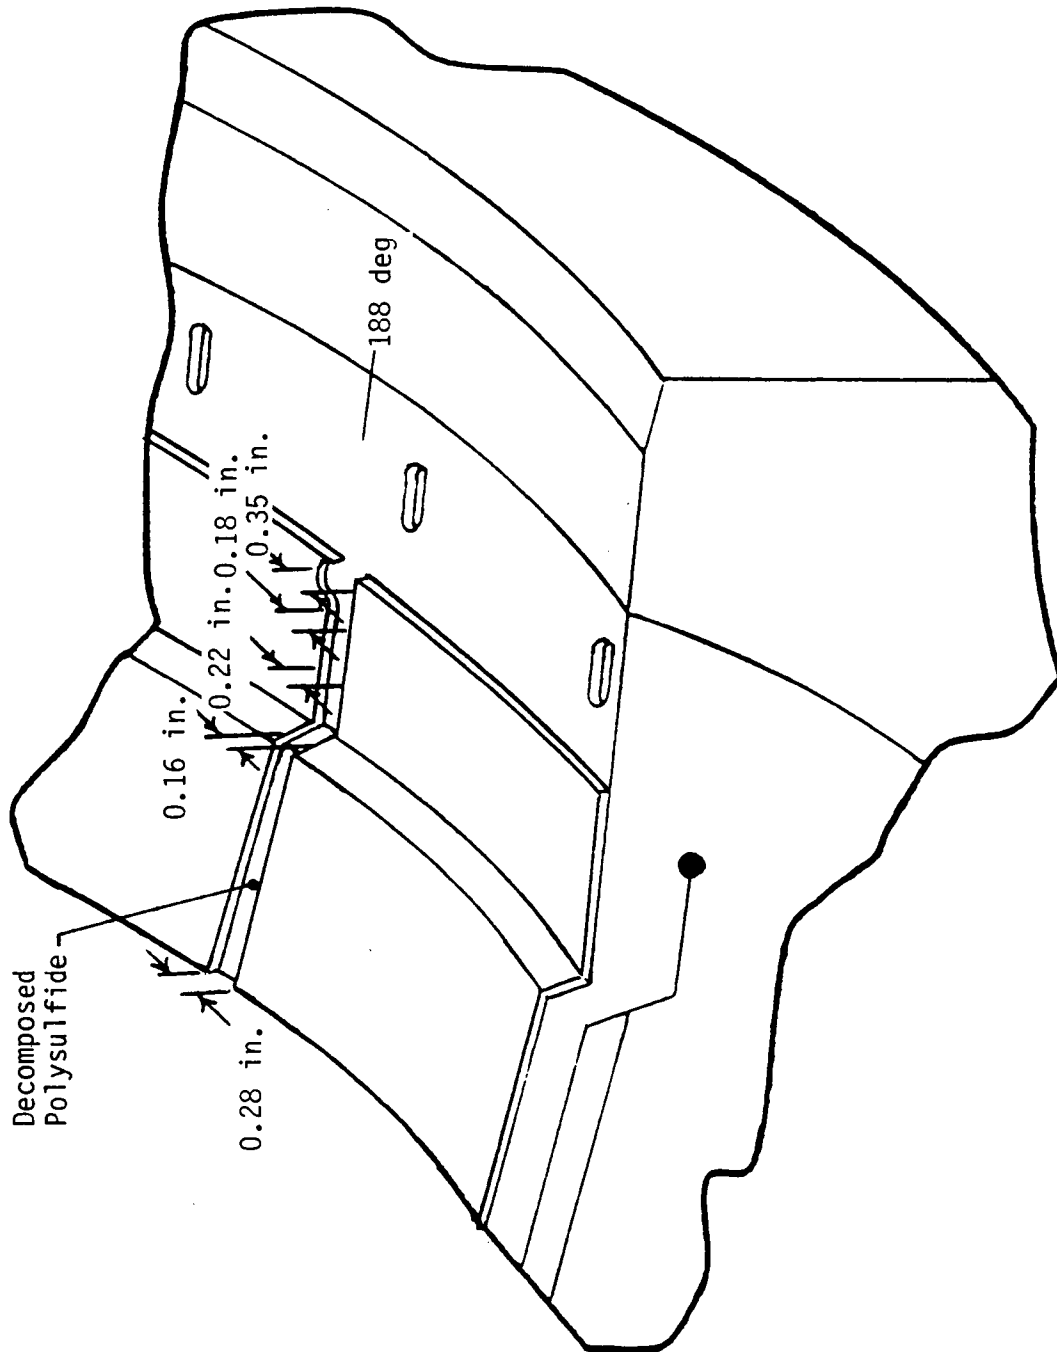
Nozzle-to-Case Joint (Joint D) Gas Path to Wiper O-ring
